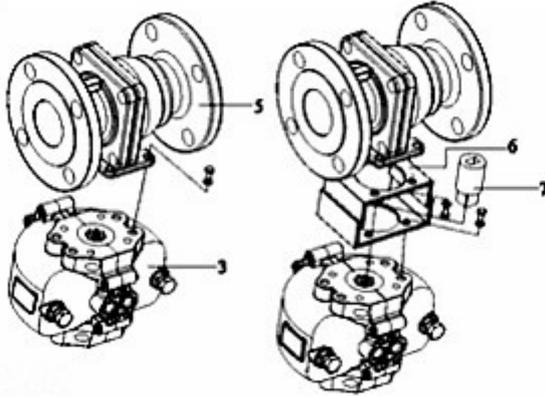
Assembly of valve: Direct Mount & Raised Mount
